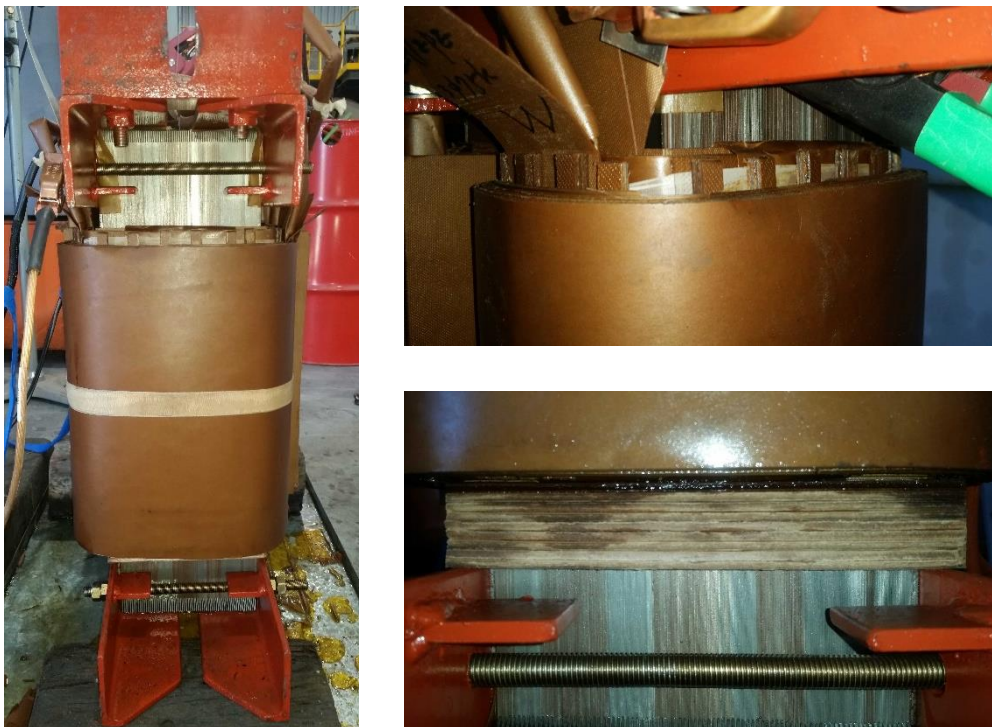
Earthing transformer core & coils assemble after inner windings axial shift upwards of 90% of the total core window and outer 'C phase' winding at the bottom of the core window. Top Right – Close view of the 90% axial windings displacement. Bottom Right – Spacer under 'C phase' prior to inner winding axial displacement.
